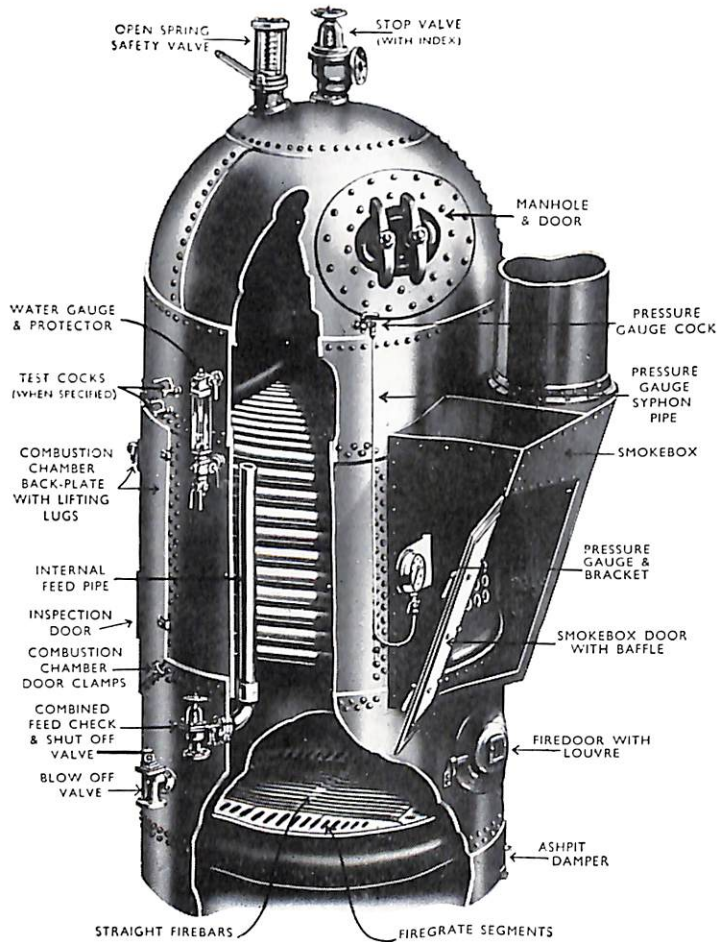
A cut-away view of a multitubular Cochran boiler.
